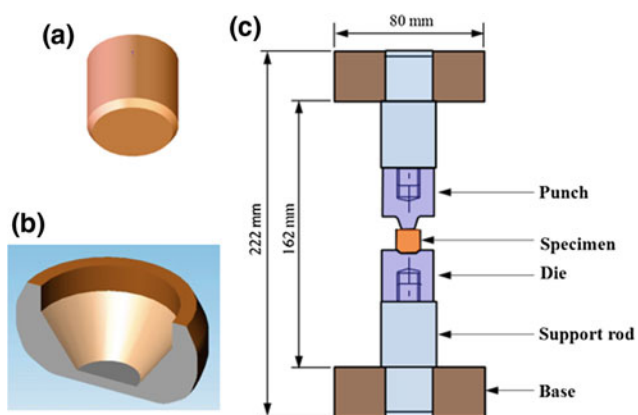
Sketches of (a) starting specimen, (b) final shape of the forging and (c) design of load train assembly for forging using servo-hydraulic machine [12]
